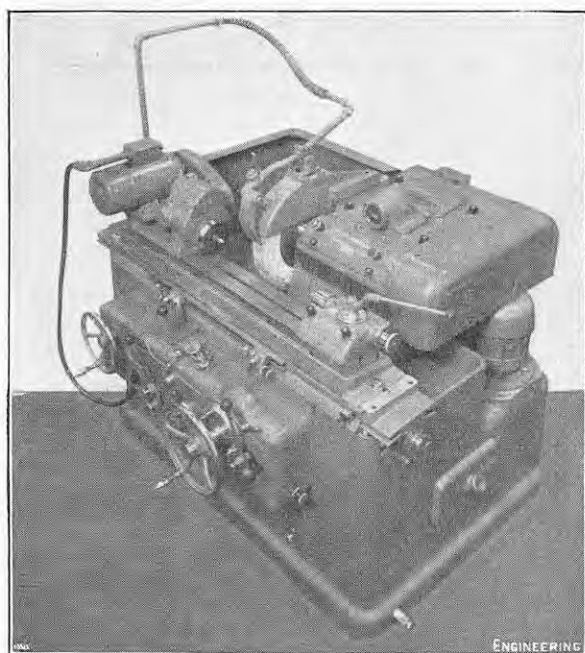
PLAIN CYLINDRICAL GRINDING MACHINE; JOHN LUND, LTD.
